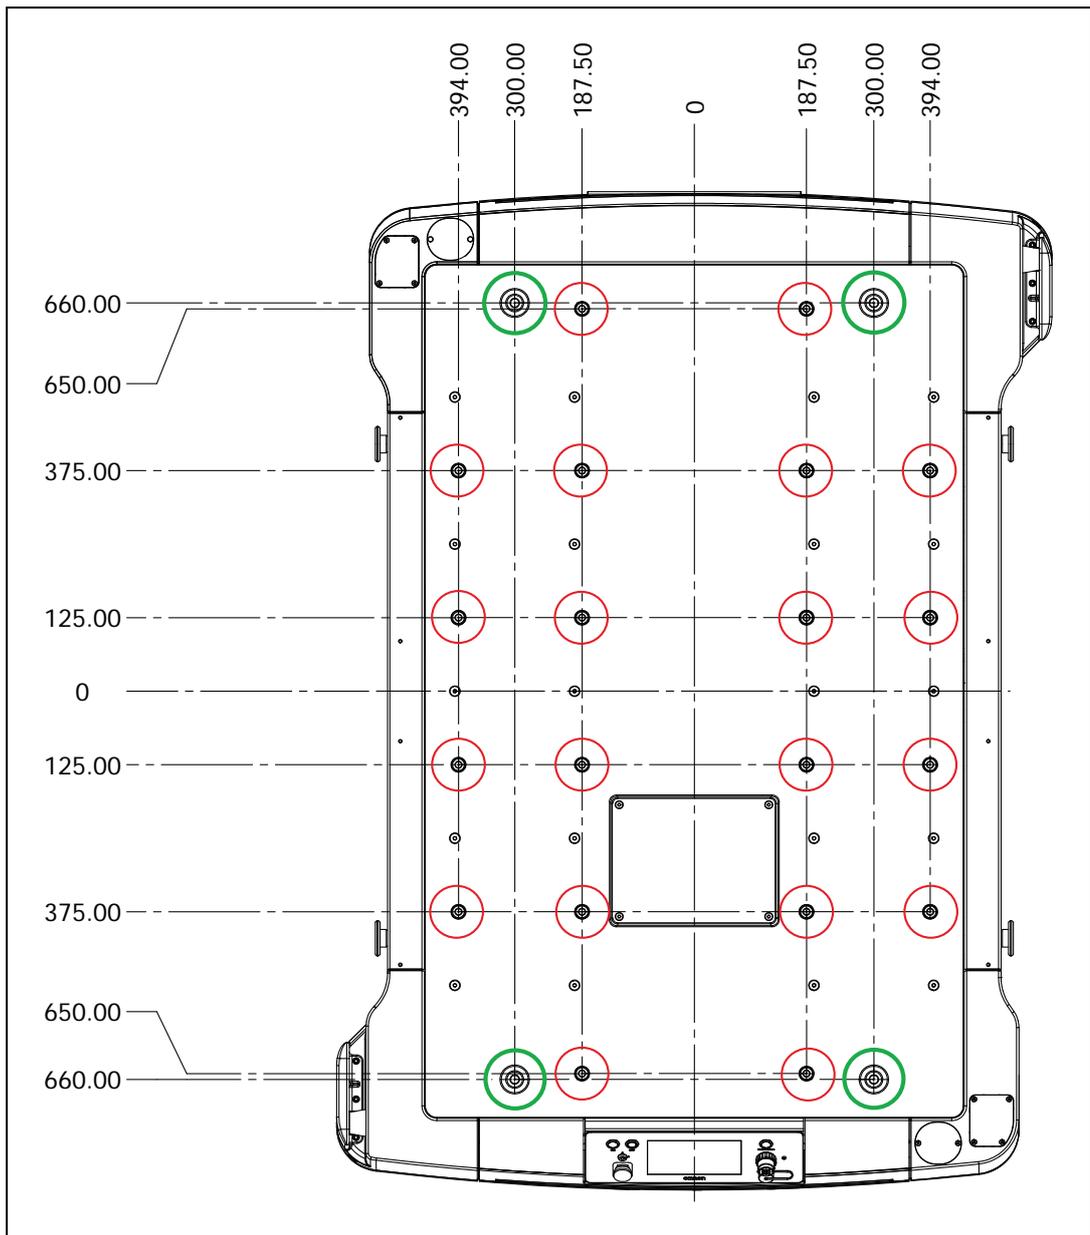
Chassis Payload Mount Locations - (20) M12 X 1.75 Threaded Holes, and (4) M16 X 2.0 Threaded Holes (units are in mm)
